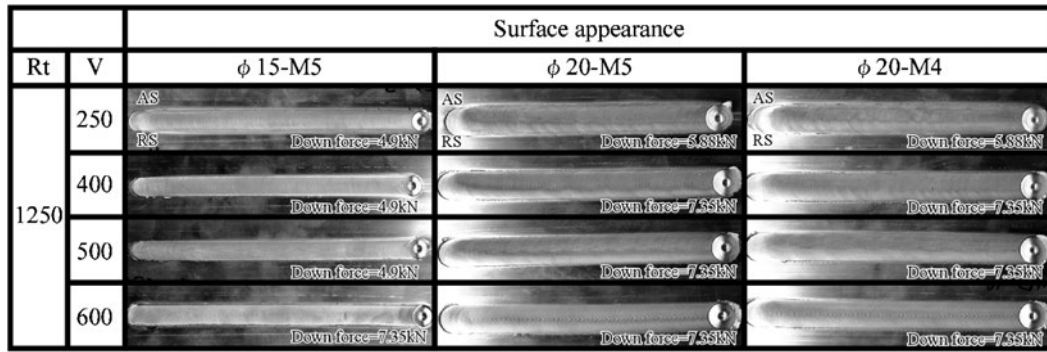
Surface appearances of RCPAZ31 friction stir welds.
